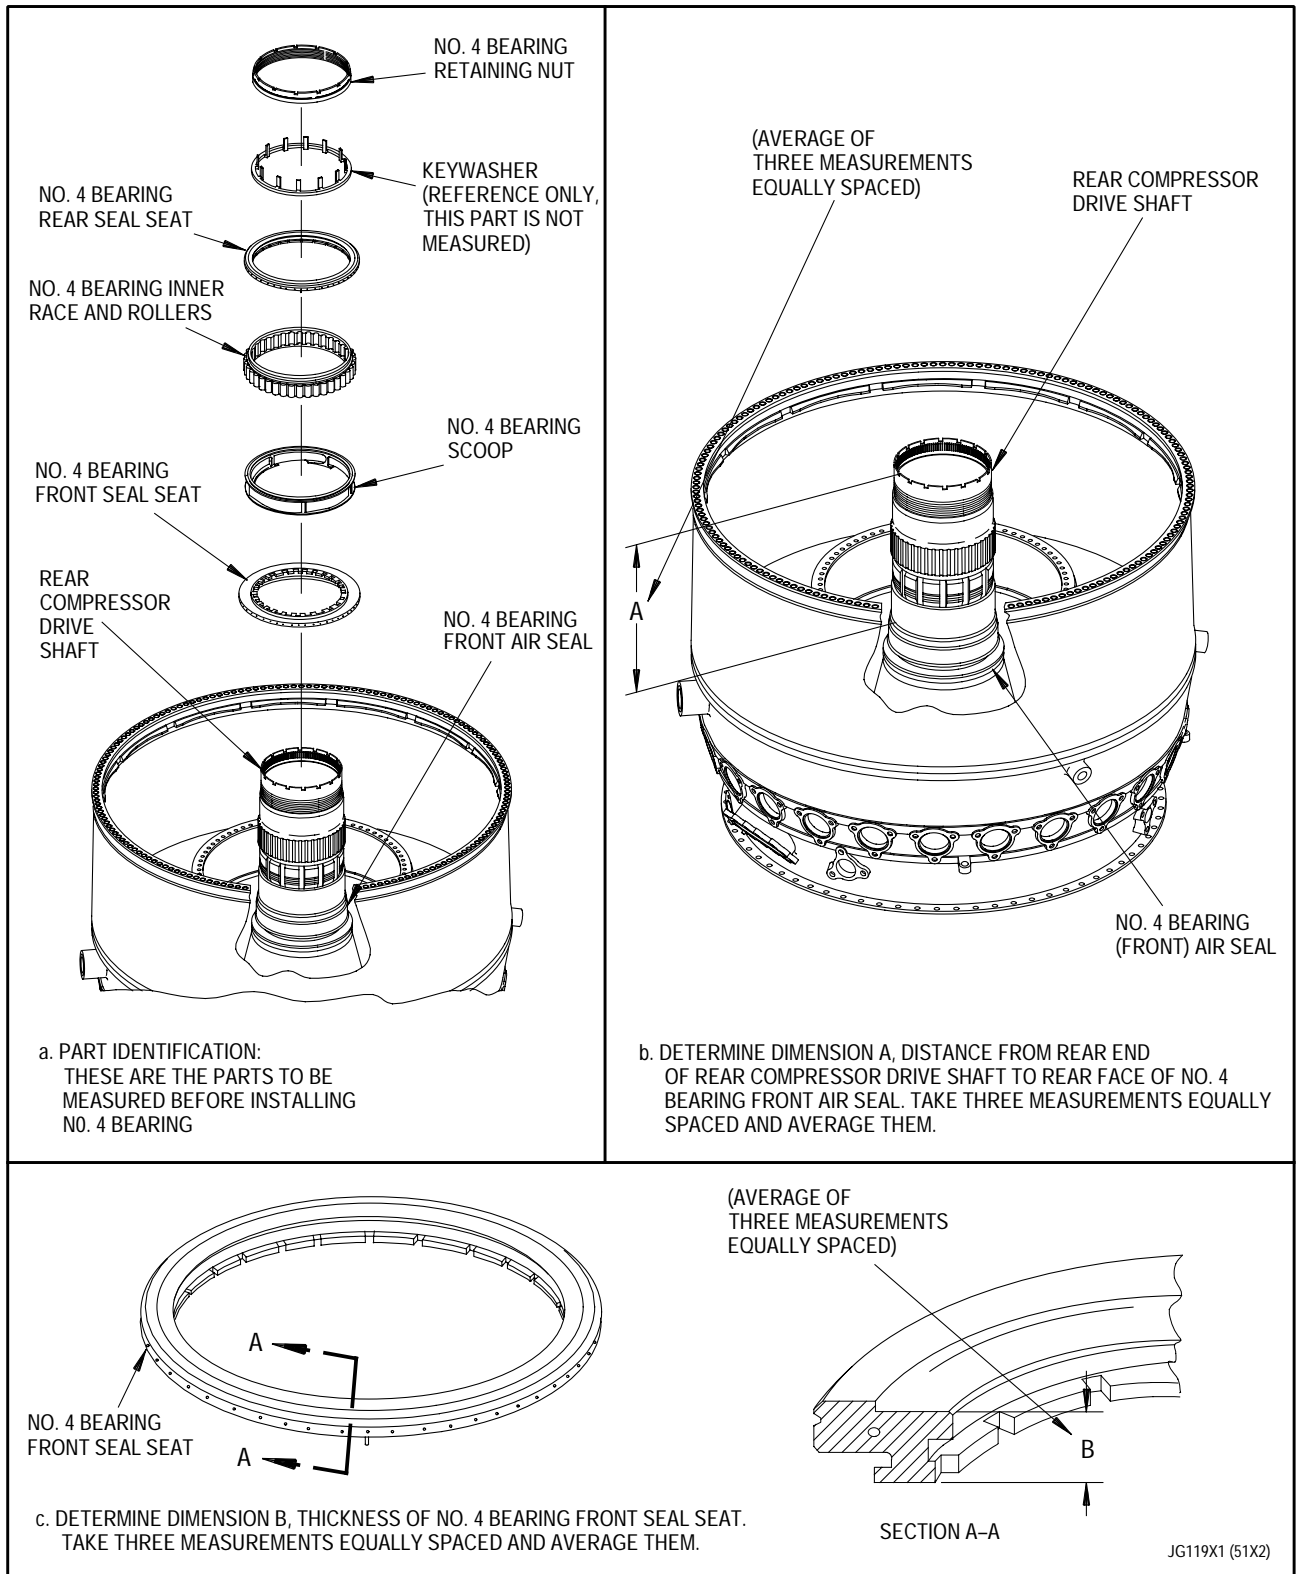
No. 4 Bearing Area - Measurement of Parts Before Installation (Sheet 1 of 3)
